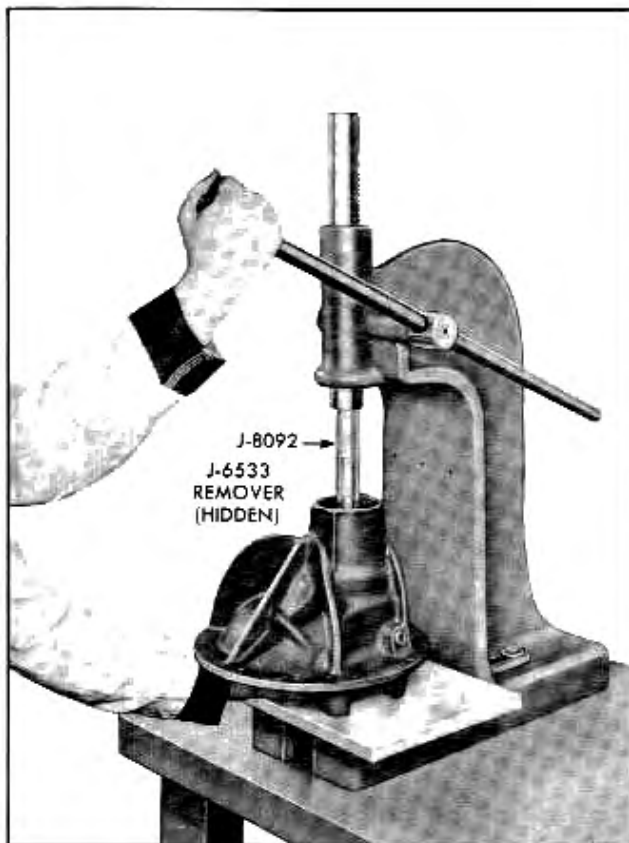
Removing Rear Bearing Outer Race With Remover J-6533 And Drive Handle J-8092
